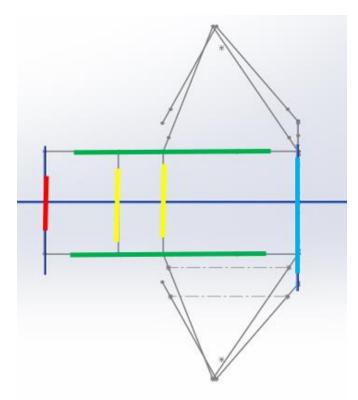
Top view sketch containing showing front bulkhead (red), front hoop (blue), front
